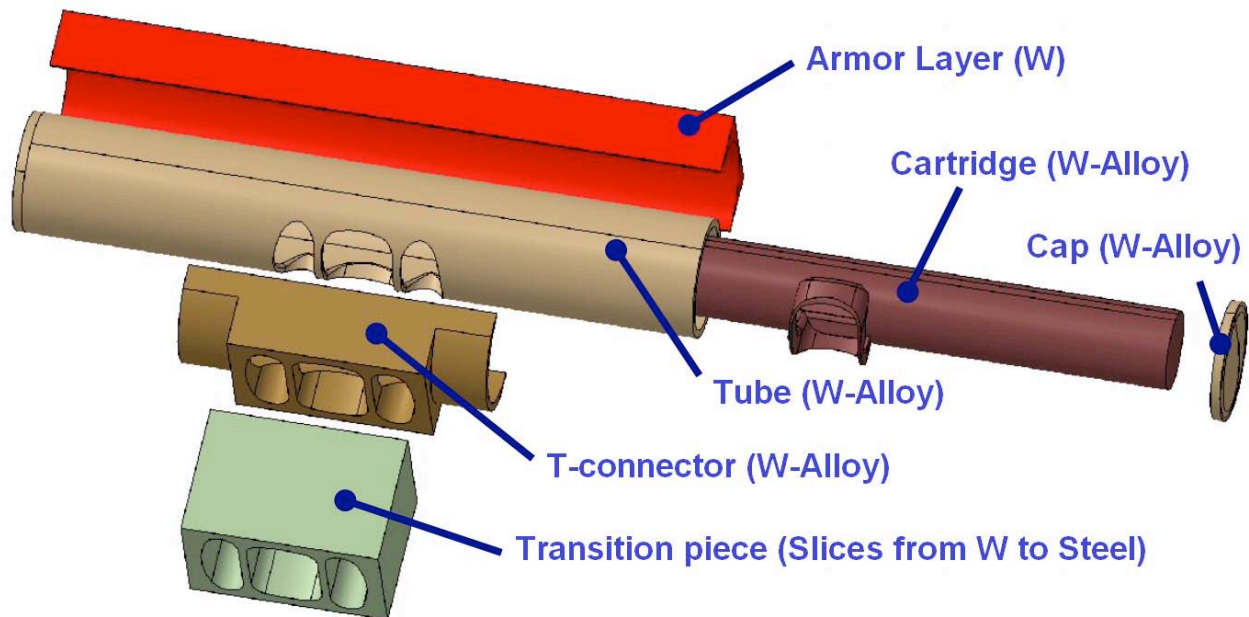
Design of the T-tube heat exchanger part (explosion view of the CAD model)
